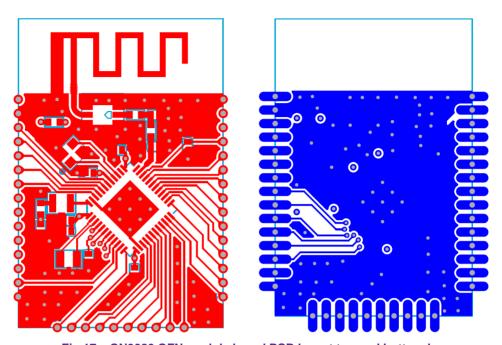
QN9080 QFN module board PCB layout top and bottom layers
